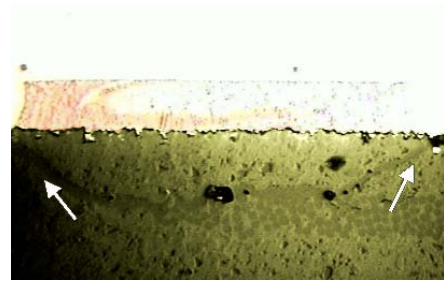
Cracked resin under the board side pad (dark line), edge bonded
